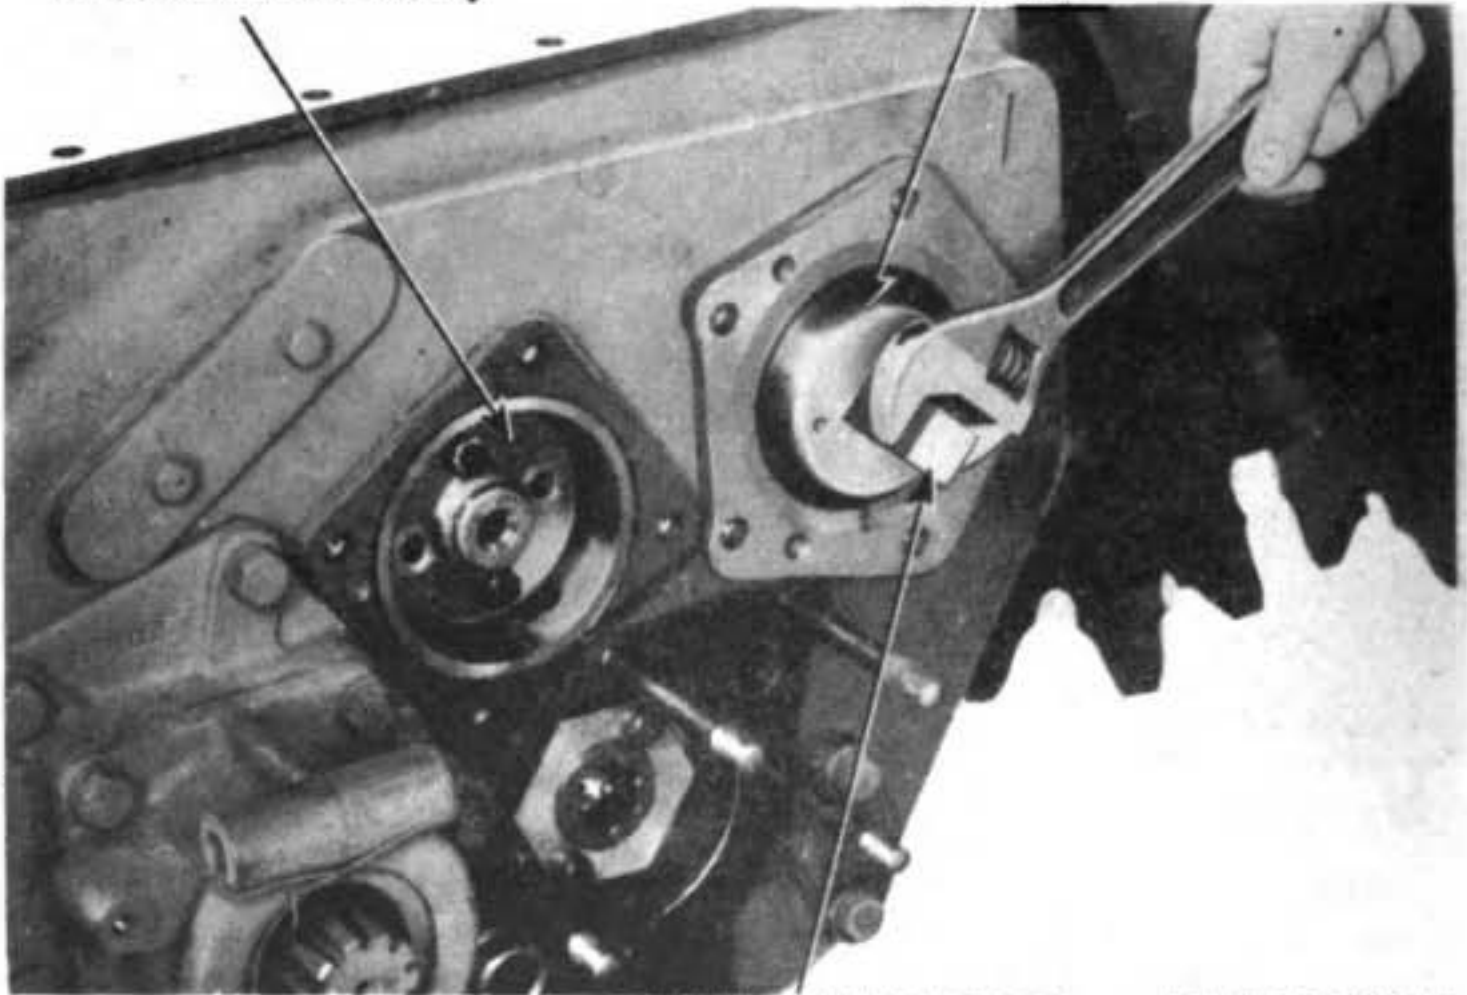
Transmission Winch Drive Shaft Rear Bearing Cage After Bearing Retainer Is Removed
